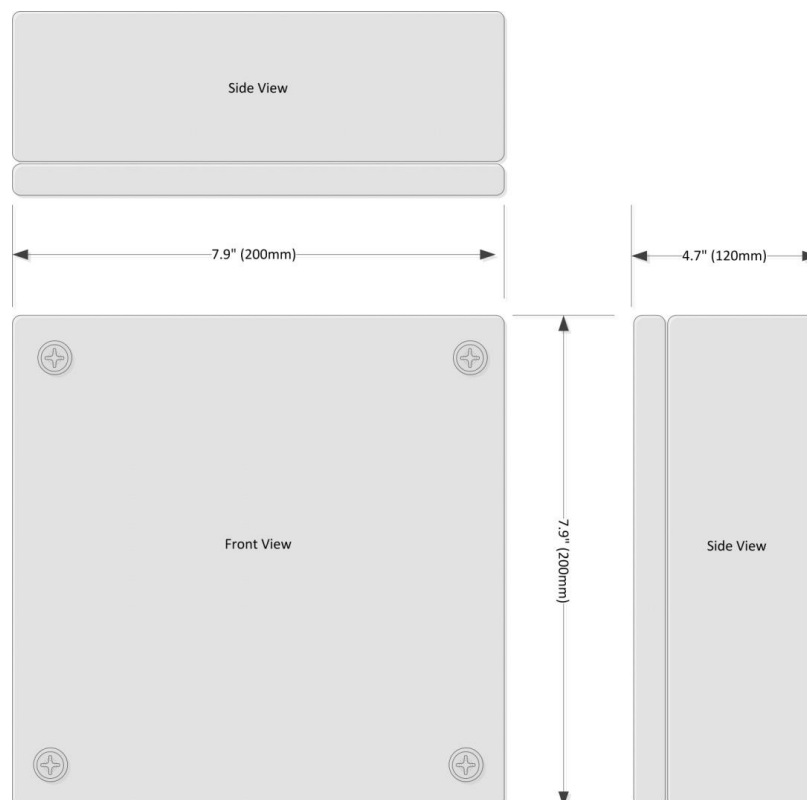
Enclosure Dimensions inches (mm): Outside, Depth
